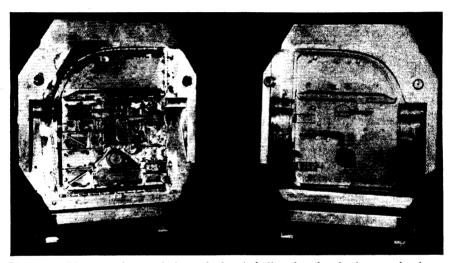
Ejector and cover halves of what is believed to be the largest aluminum die-casting die ever built. With dies of this size, or with smaller, more complex dies, extreme care must be taken to prevent warpage and distortion during heat-treatment.
